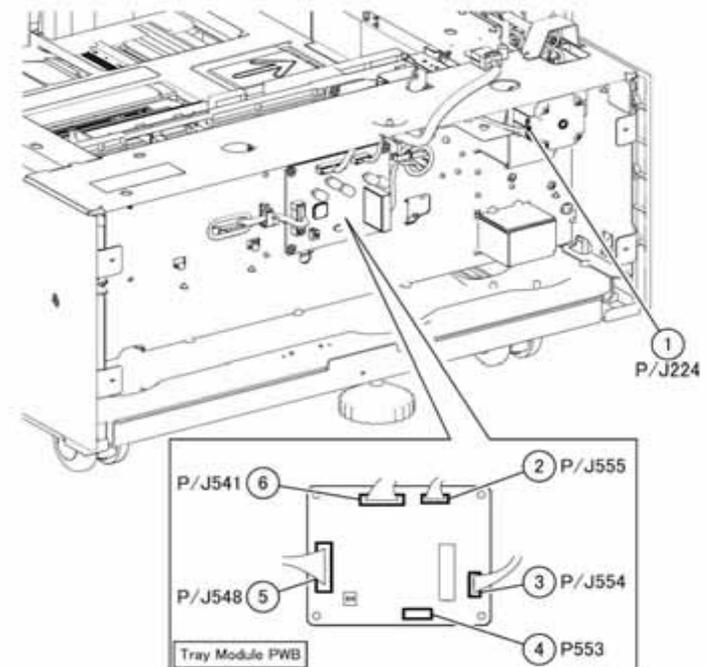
Tray3/4 Feeder, Tray Module PWB, TM Take Away Motor
